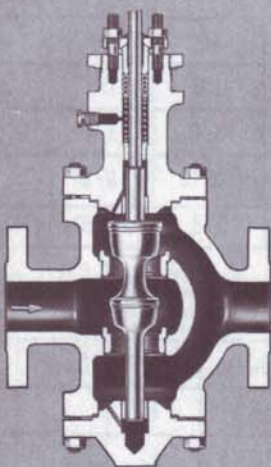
Double port Design "AR" body with reverse acting V-Pup valve plug.
